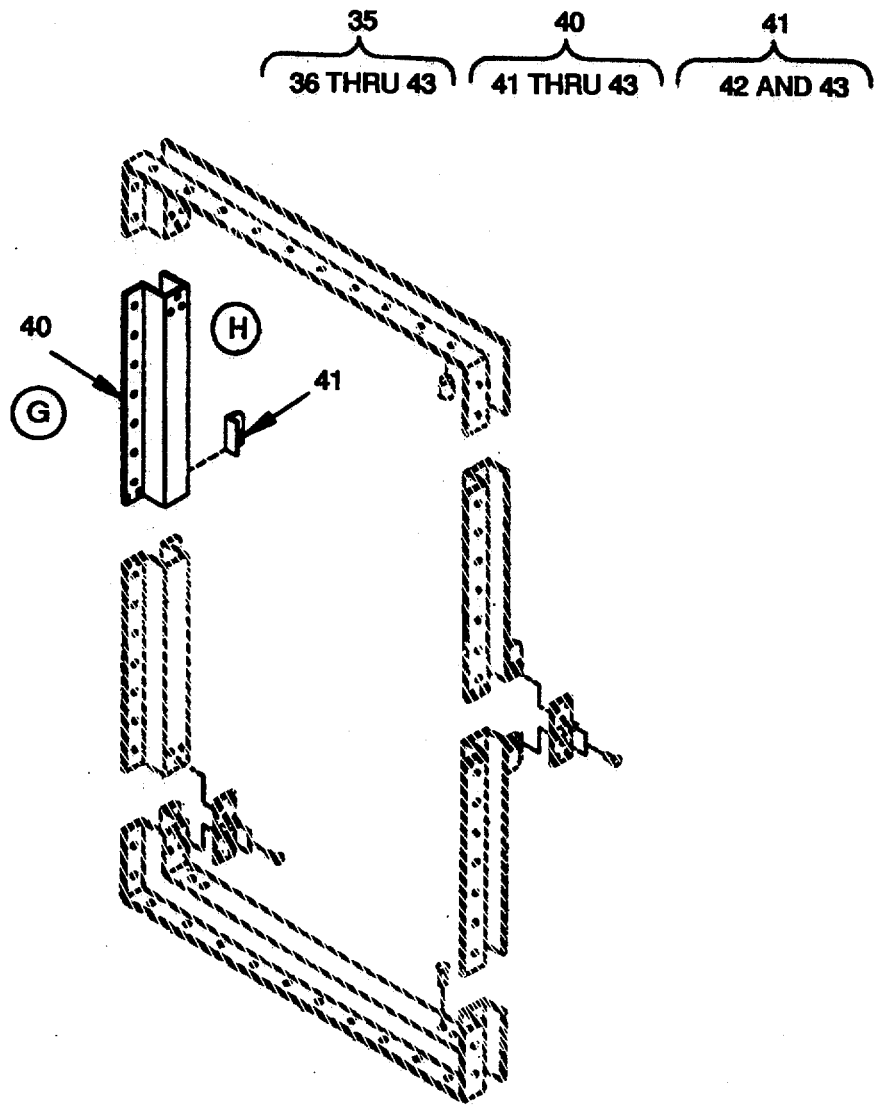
FRAME ASSEMBLY (ISO) (SHEET 3 Of 3)
